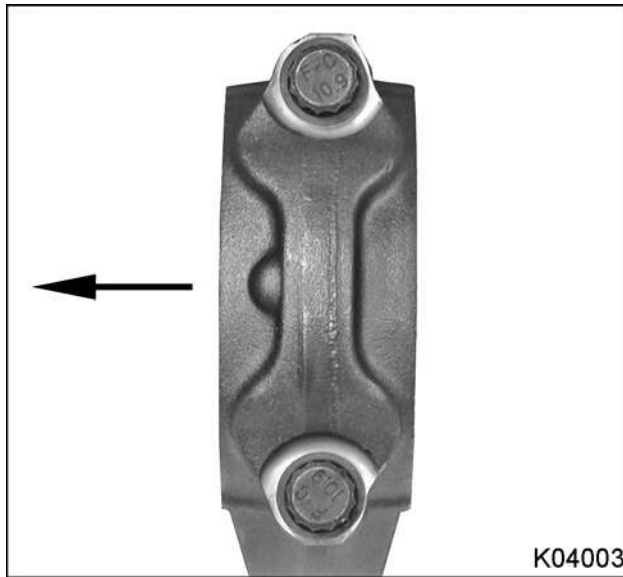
Connecting rod cap with M11 connecting rod cap bolts (protrusion points to front of engine)
